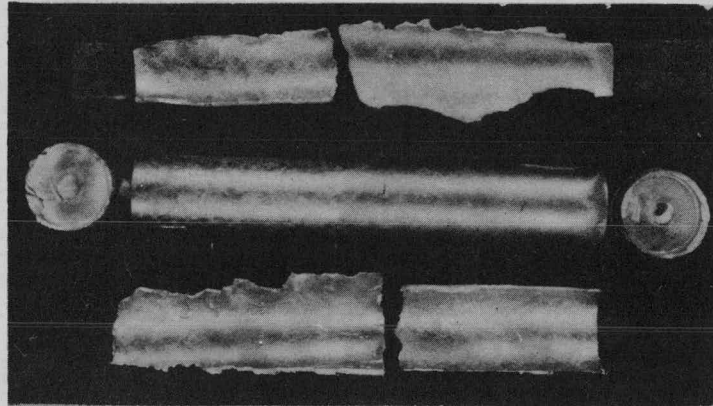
W SLUG COATED IN E.C.M. AND USING A STAINLESS STEEL SLEEVE INSERT. BOTTOM OF SLUG IS LEFT SIDE. NOTE SPANGLED APPEARANCE OF COMPOUND LAYER.
